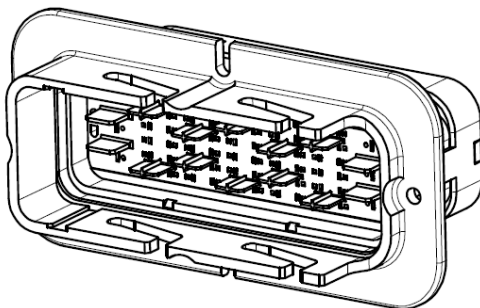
SRC 60+6 Mixed Power Blade Assembly Housing Mating Interface
